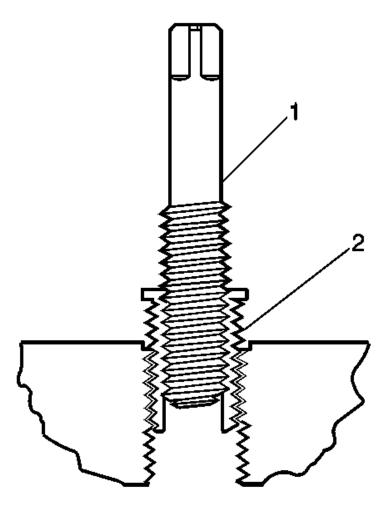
Tapped Bolt Hole Courtesy of GENERAL MOTORS COMPANY
